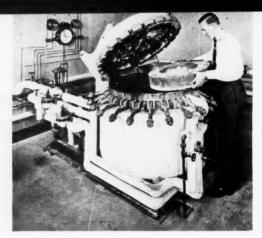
Steam-heated Container Used for Vulcanizing Rubber
